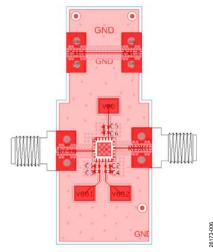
HMC1126-EVALZ Assembly Drawing (CAL1 and CAL2 Not Installed)
